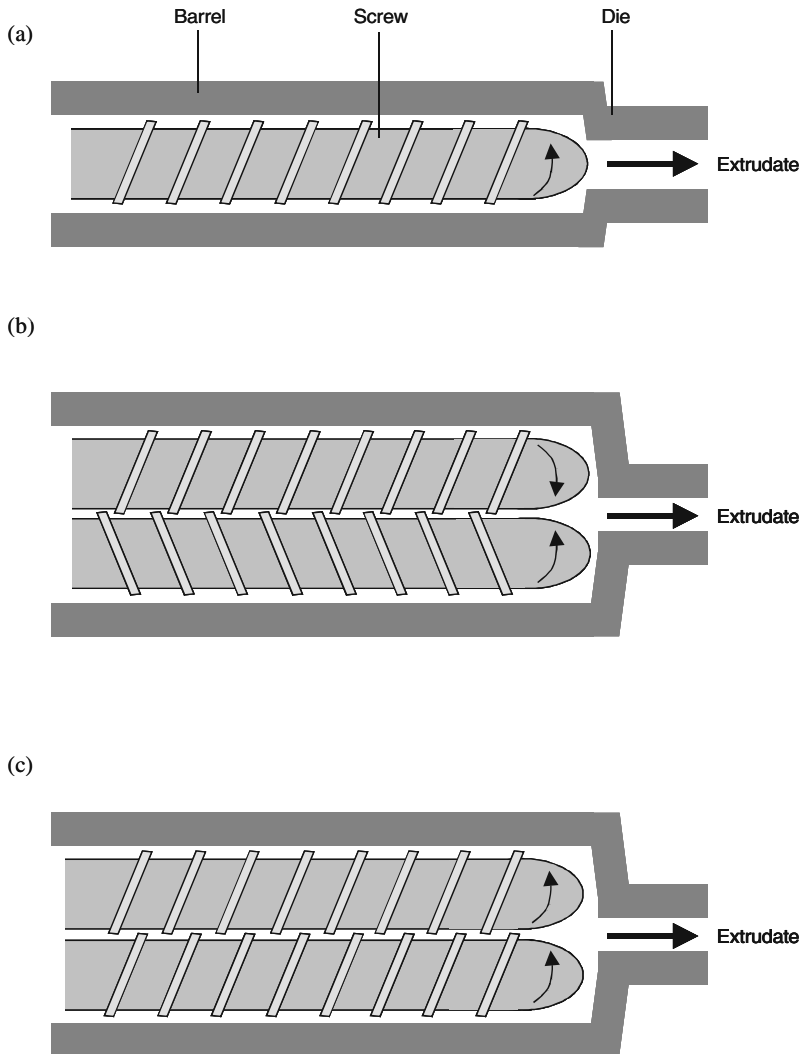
Schematic diagram of screw extruders (longitudinal cross-section): (a) single-screw augur; (b) counter-rotating twin-screw extruder; (c) co-rotating twin-screw extruder
